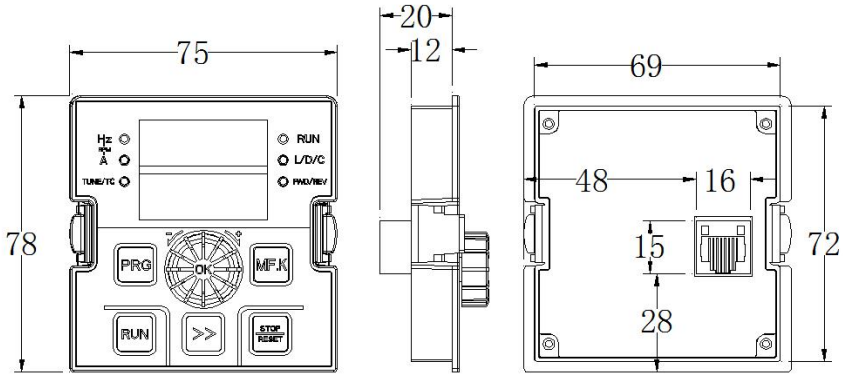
380V (4T) 4.0kW or more external lead-in keypad without tray mounting dimensions
